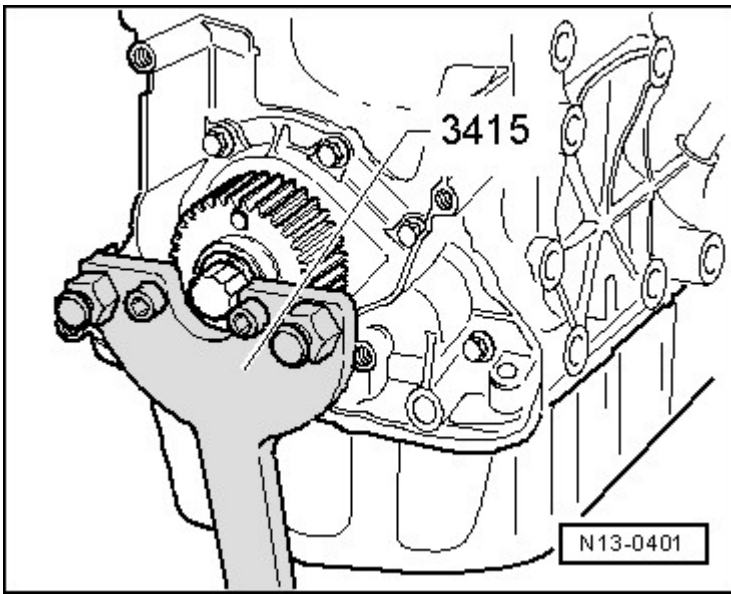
Counter-Holding Crankshaft Toothed Belt Sprocket With 3415
